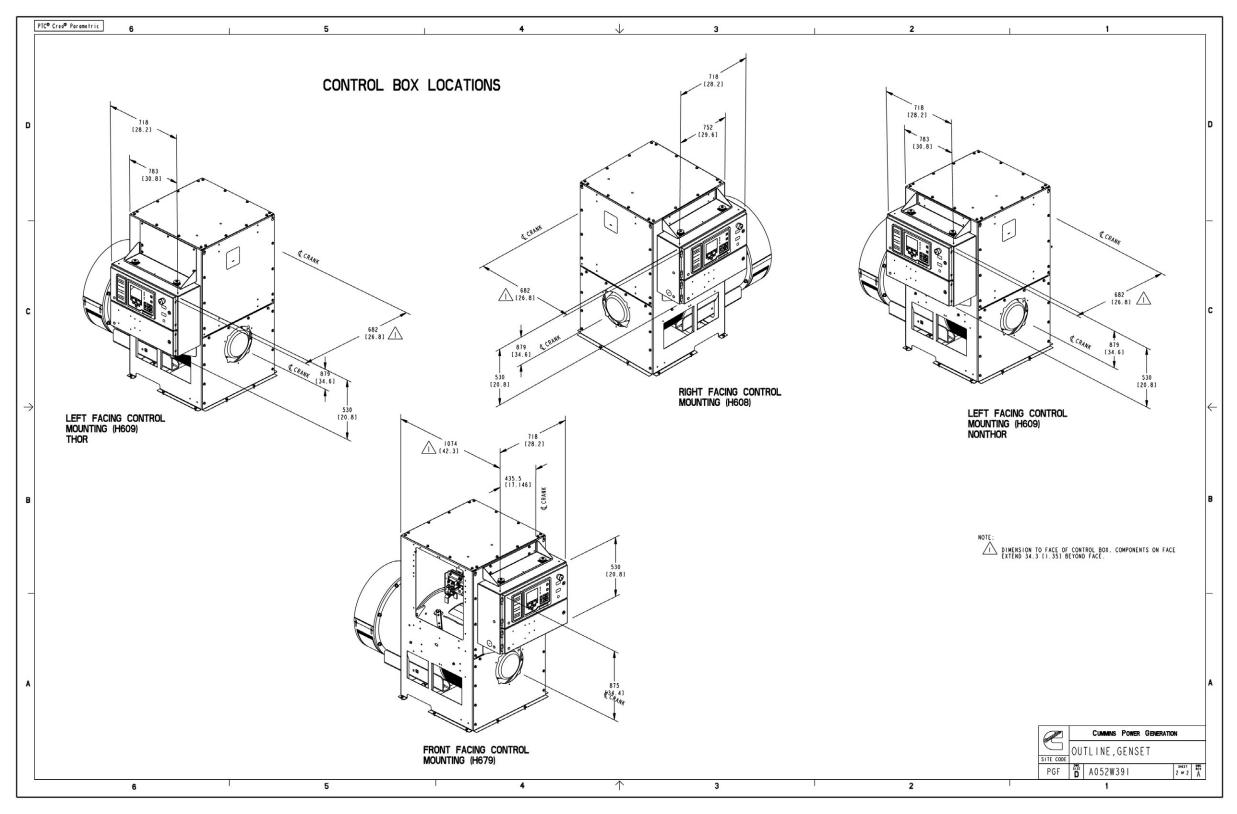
OUTLINE DRAWING - CONTROL BOX LOCATIONS
